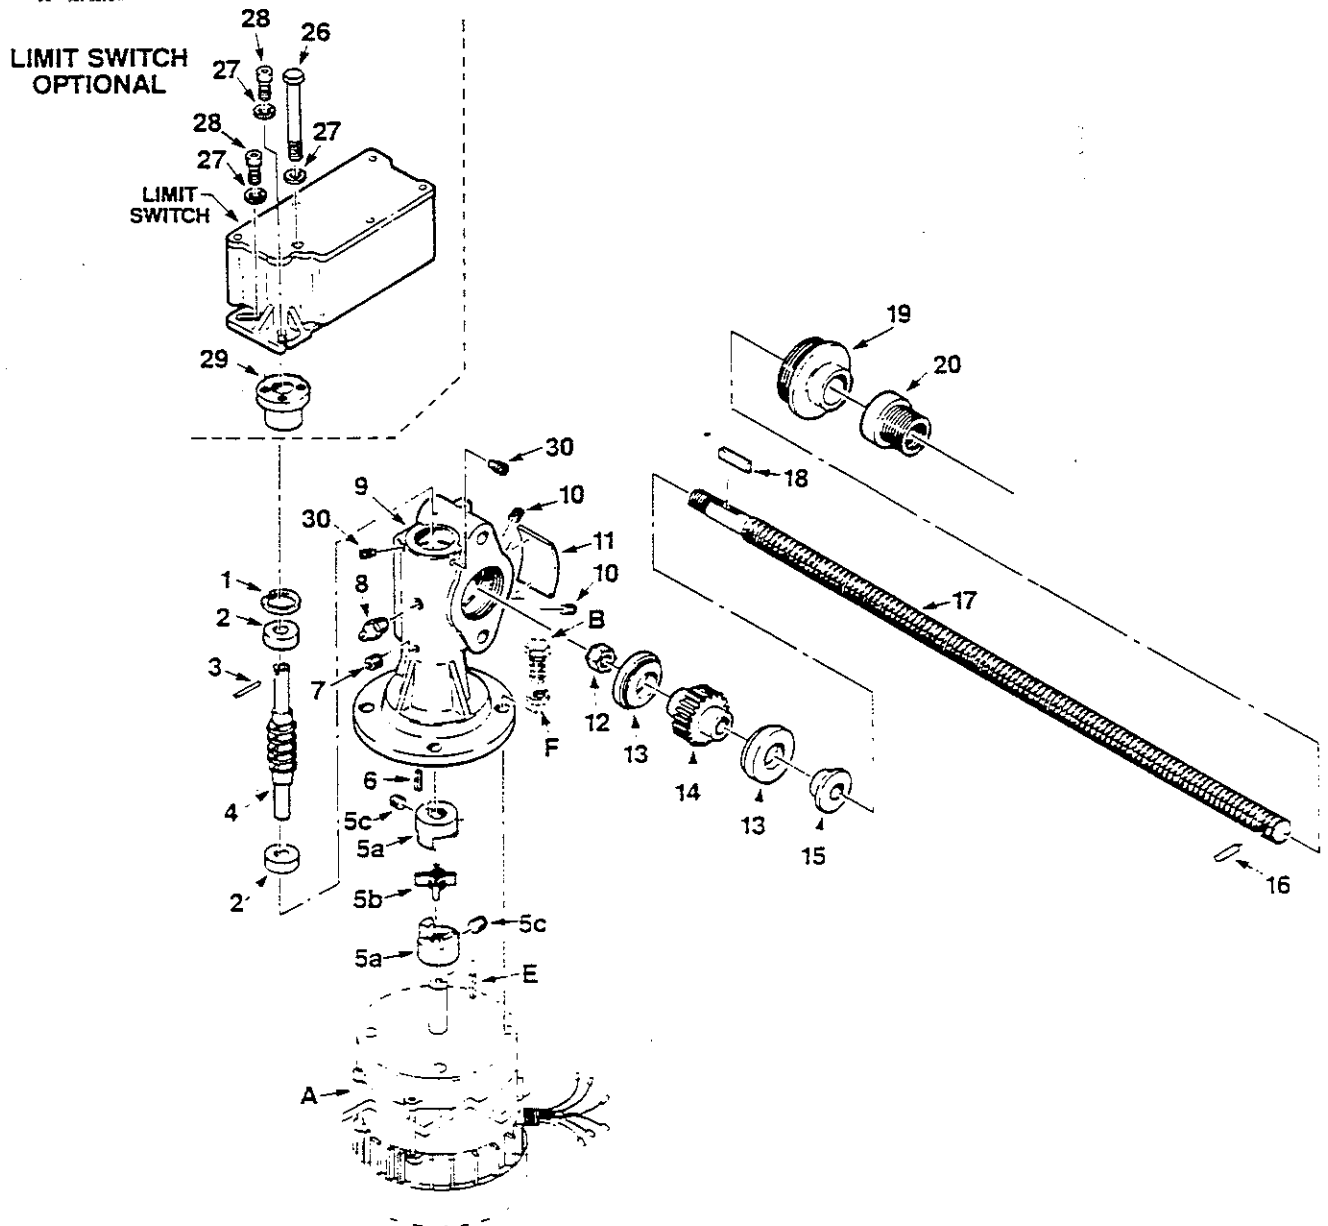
EXPLODED ILLUSTRATION ROTATING SCREW MODULAR ACTUATORS MODELS M-2462 AND M-2463
